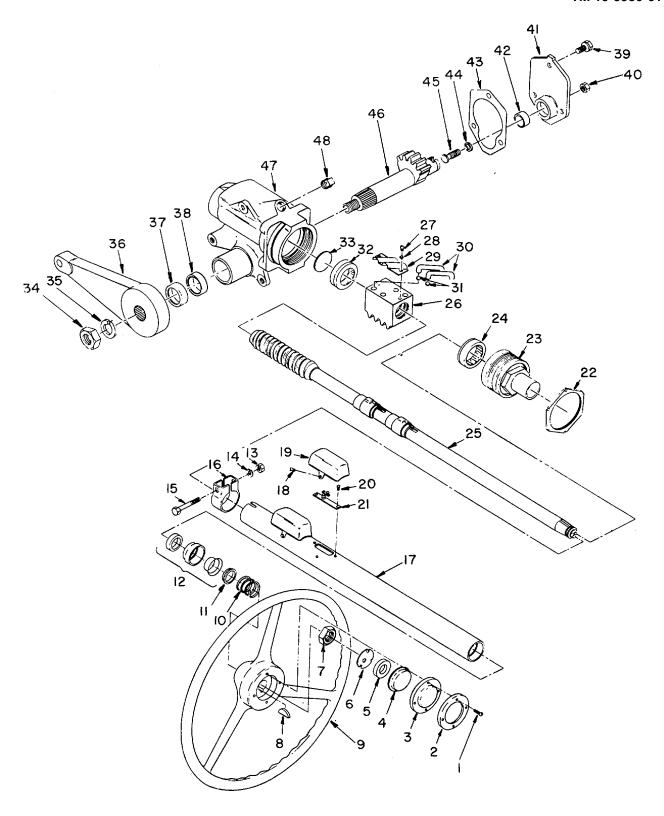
Steering gear assembly, disassembly and reassembly.
